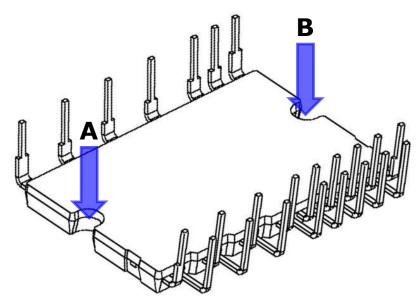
Reommended screw-tightening order: Pre-screwing A → B, Final screwing A → B
